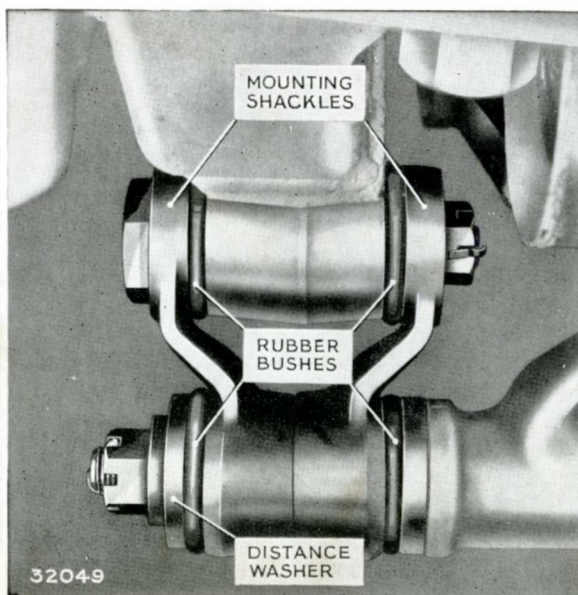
ENGINE FRONT MOUNTING SHACKLES
